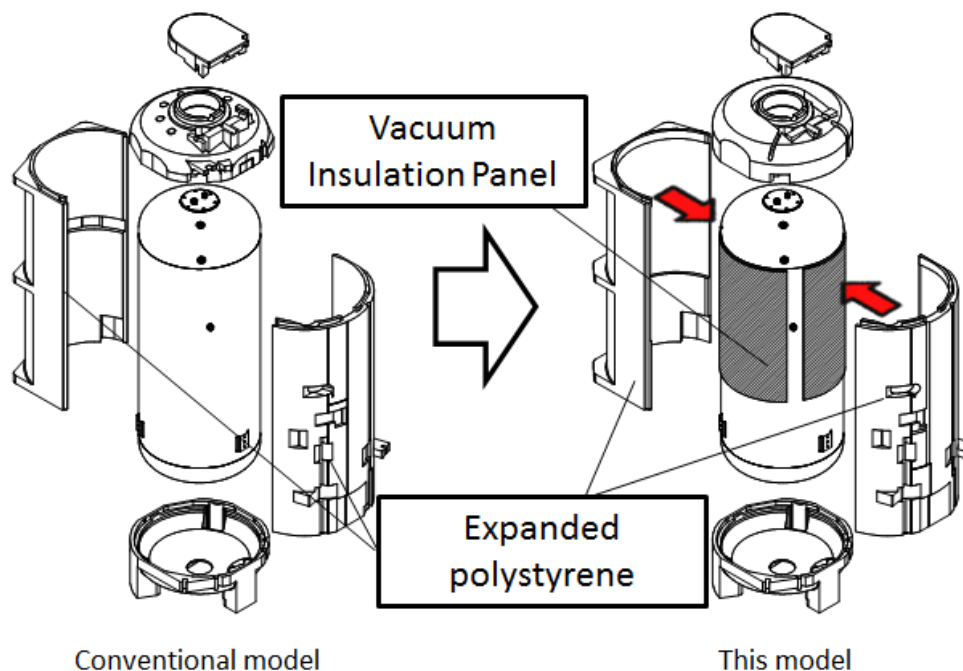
Construction of Tank Heat Retention “Double Heat Insulation Construction”
